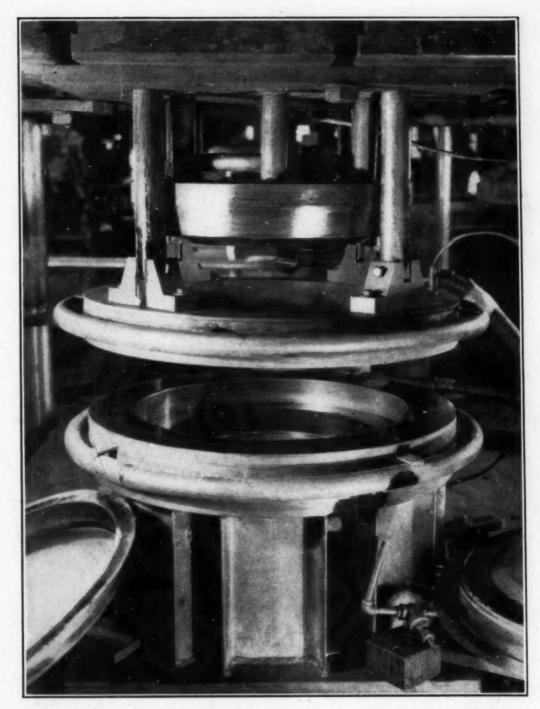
Typical Mating Die for Hot Drawing and Pressing Magnesium Alloy Sheet.
